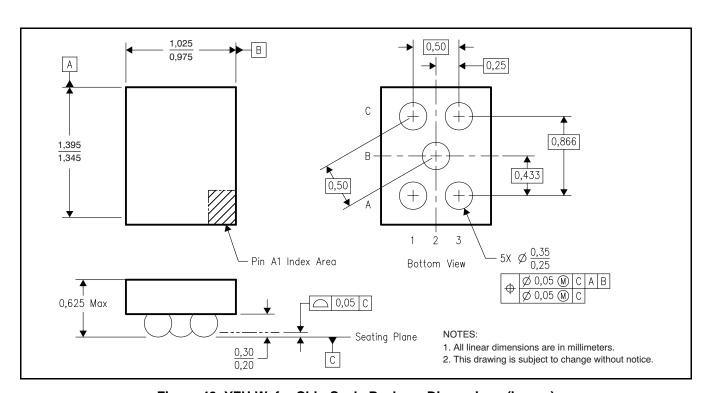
YZU Wafer Chip-Scale Package Dimensions (in mm)
